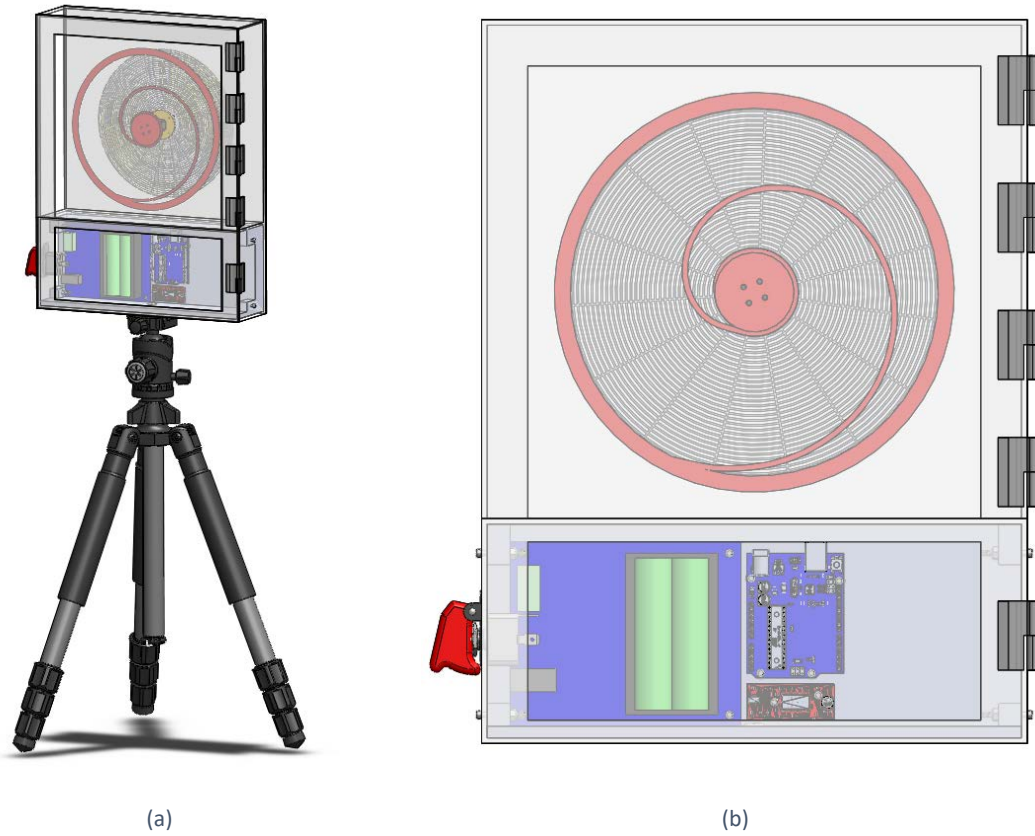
Final design, (a) Device mounted on tripod, (b) front view.
